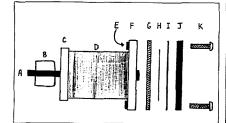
Magnetic headphone assembly (see Parts list for key).
